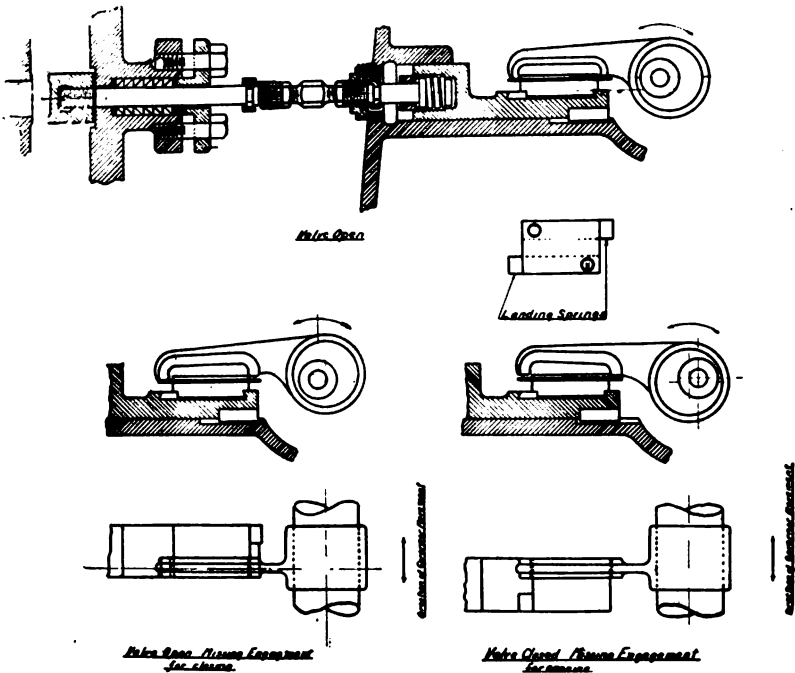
NEW MECHANICAL VALVE GEAR FOR SMALL-SIZE CURTIS TURBINES
